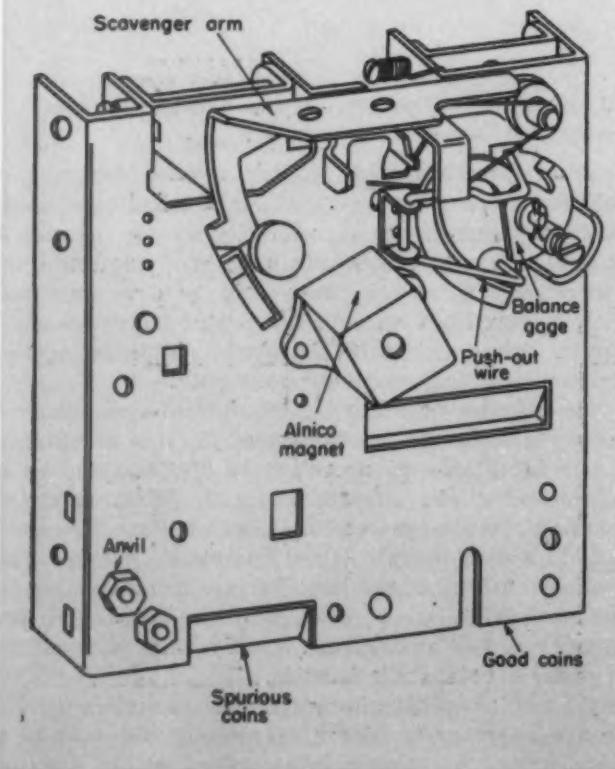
Above—Basic unit for testing a single coin before operating the machine
